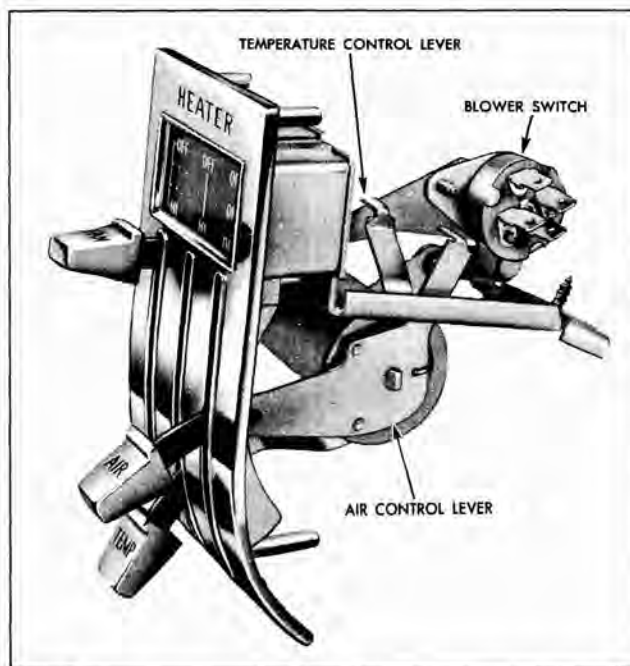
Tempest Control Panel Control Cable Linkage
